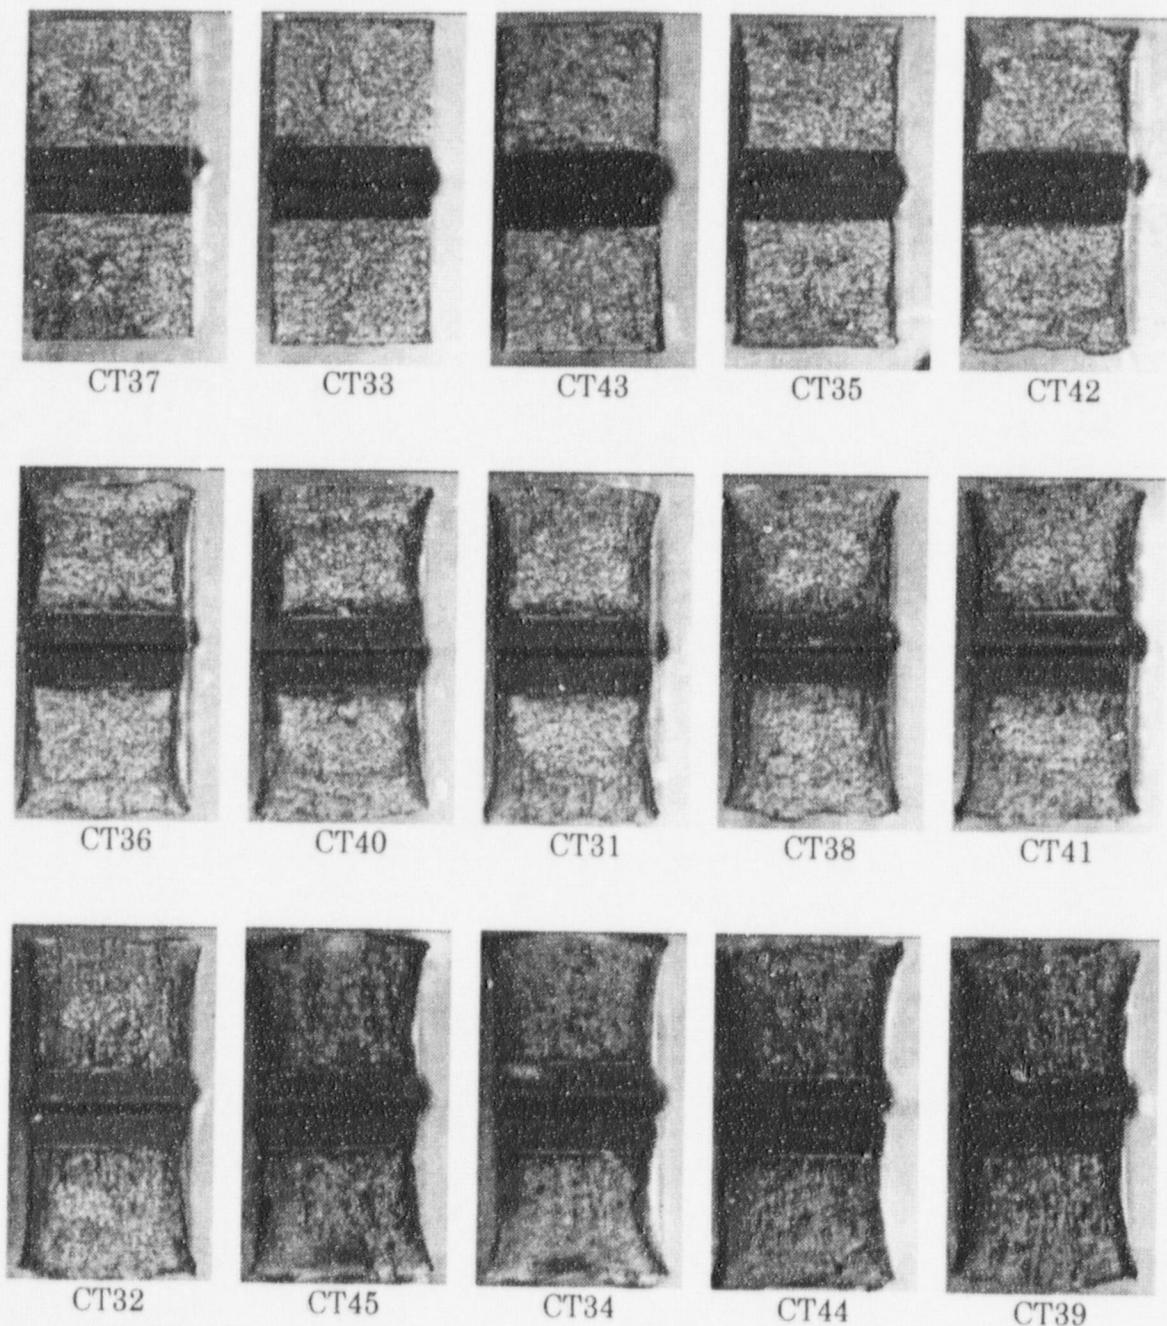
Charpy Impact Specimen Fracture Surfaces for V.C. Summer Unit 1 Reactor Vessel Intermediate Shell Plate A9154-1 (Transverse Orientation)
